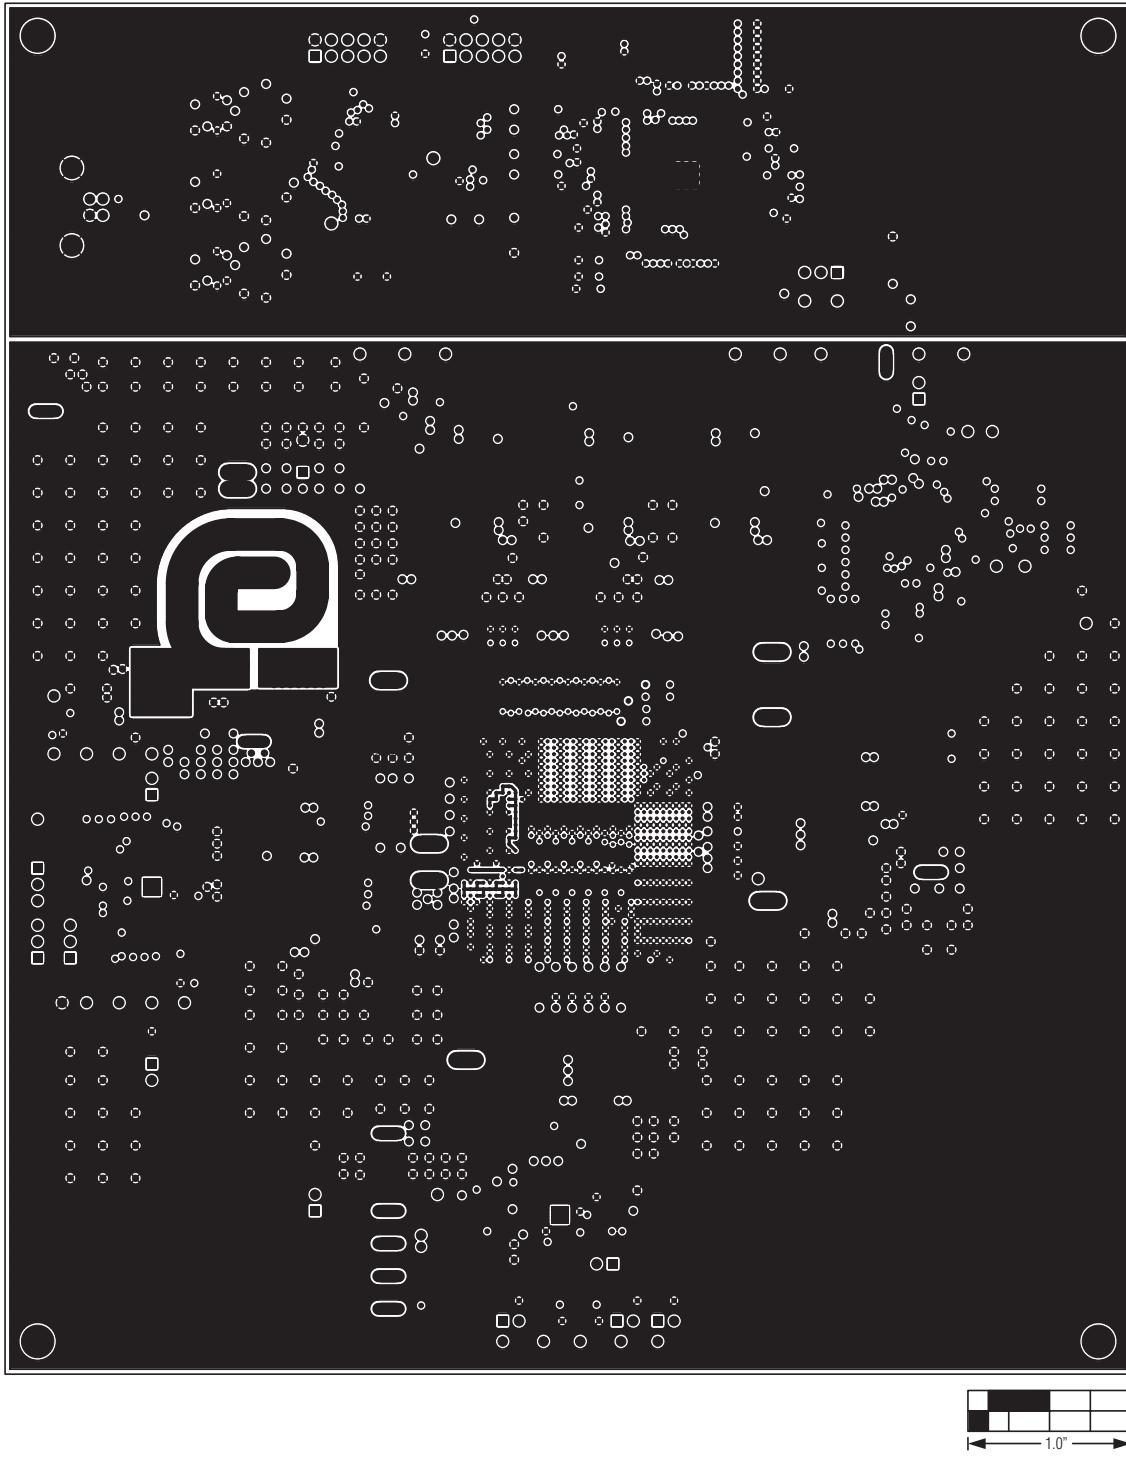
MAX17039 EV Kit PCB Layout—Internal Layer 2 (PGND Plane)
